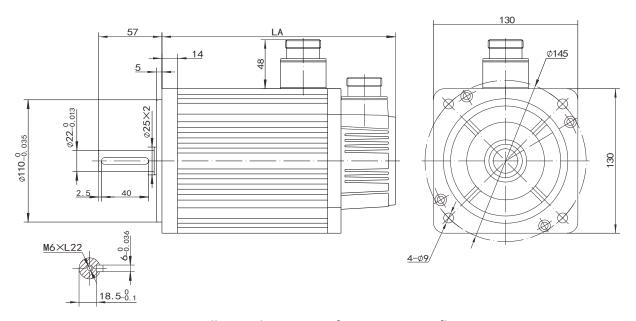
Installation dimension of WE series 130 flange servo motor
